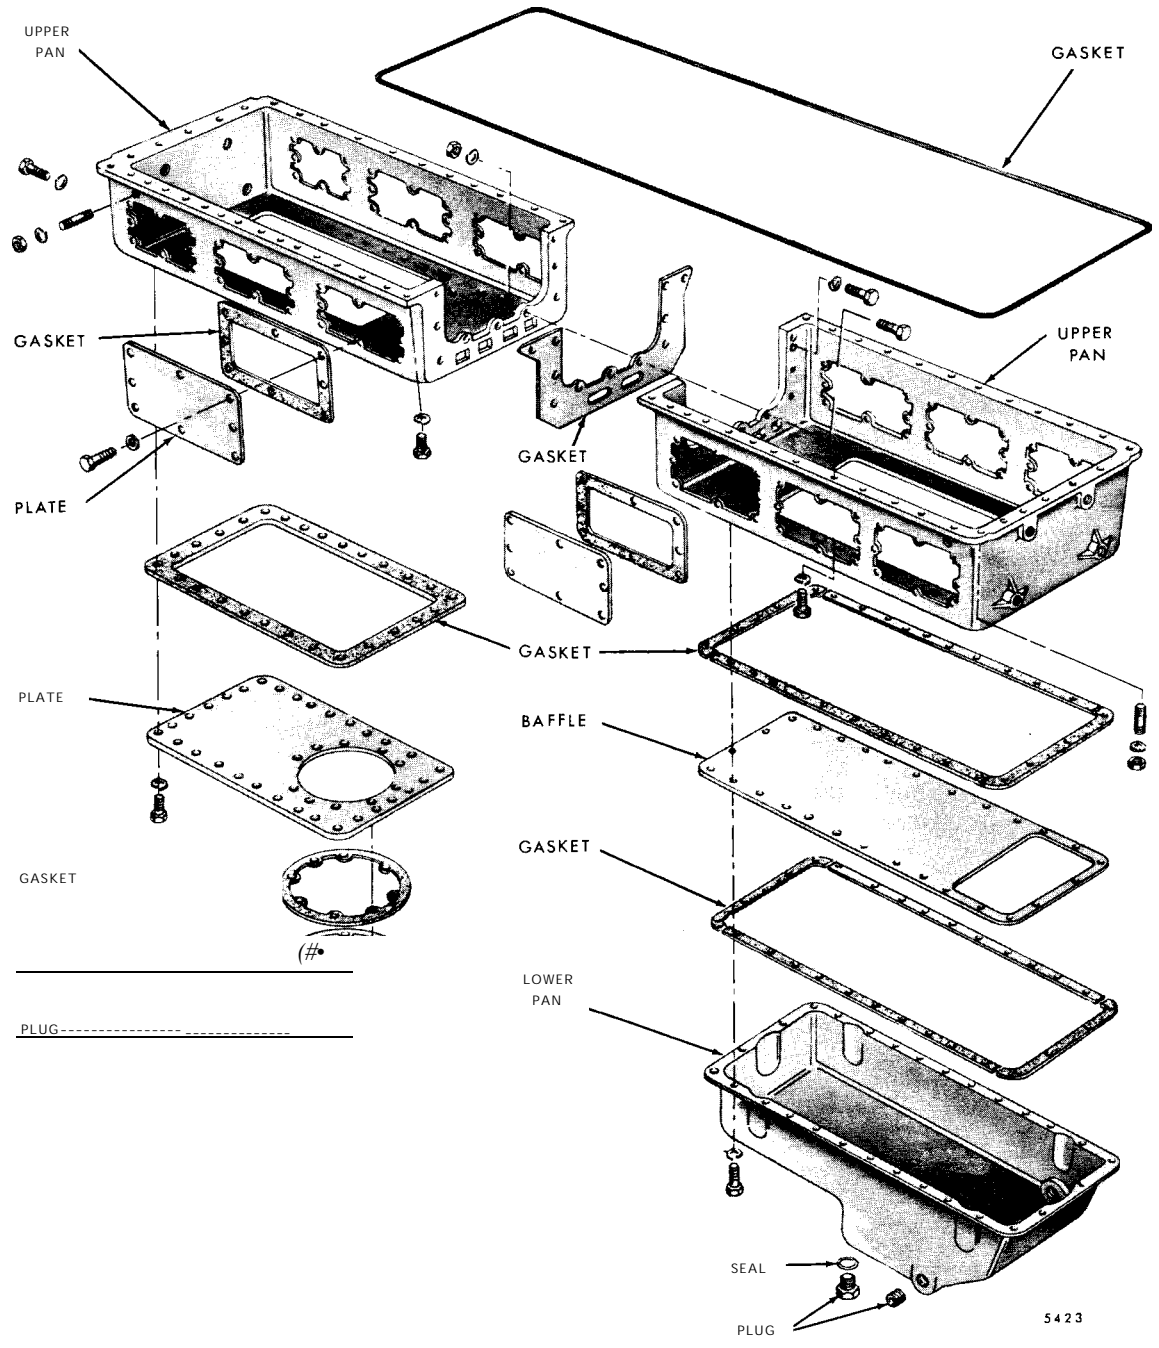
Typical Oil Pan and Relative Location of Parts
